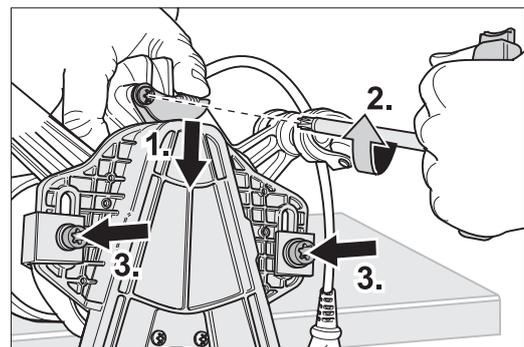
Hold the FLIP firmly at the suction socket, press on the belt tightener plate and tighten the three screws.
